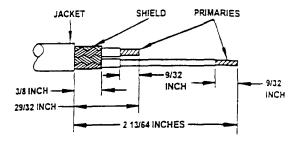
Double Shield Cable Repair with Solder Sleeve Primary Splice (Sheet 3)
